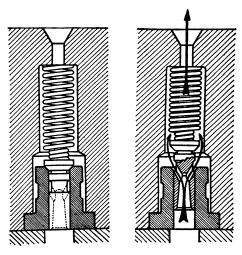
Pump Outlet Valve Providing Relief in Delivery Line.
